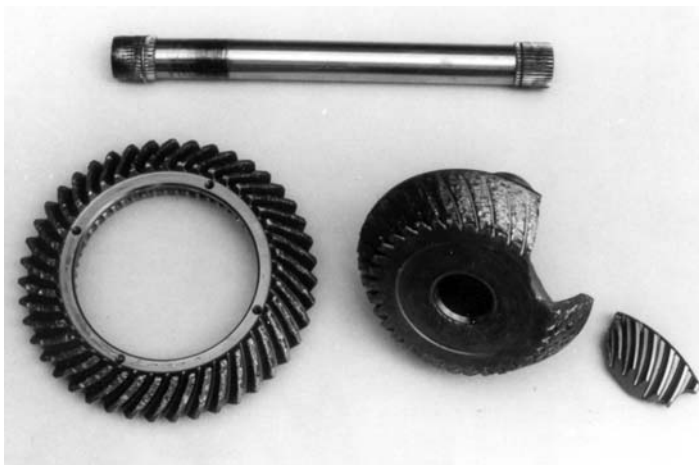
Damaged driving gear, damaged shaft, and fractured driven gear
